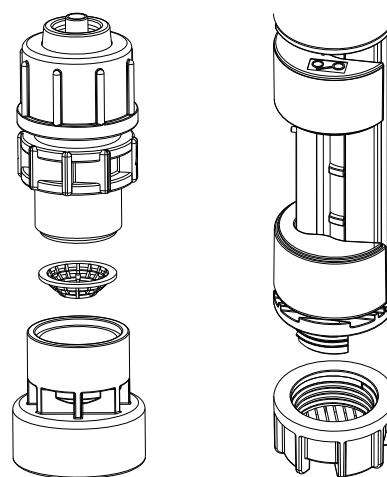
Foot valve (left), suction lance (right): removing the strainer
